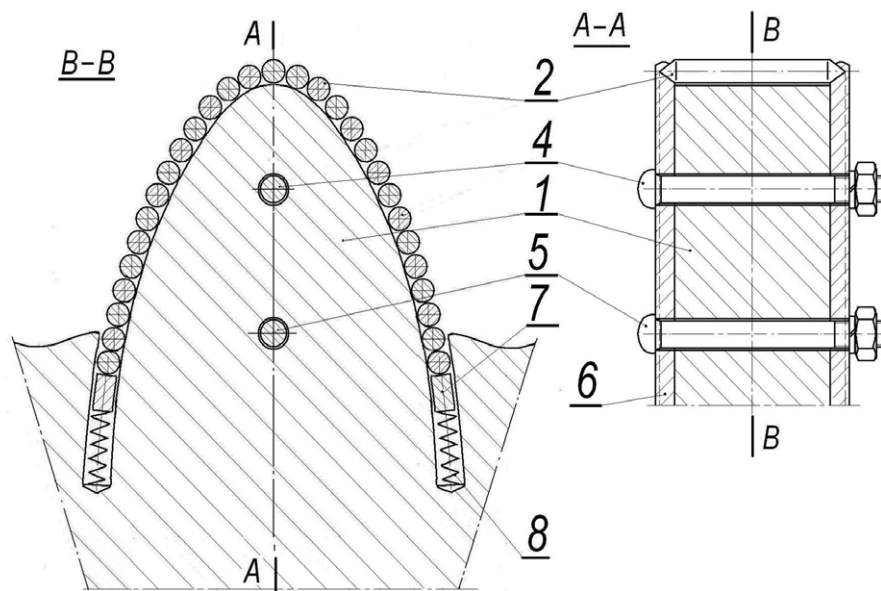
Tool for pressure burnishing of working surfaces of gears
